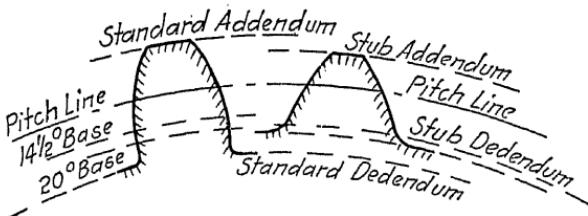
Comparative outlines of a 24-toothed gear of standard $14\frac{1}{2}$ -degree involute proportions, and of 24-toothed stub tooth gear, 20-deg. involute.
